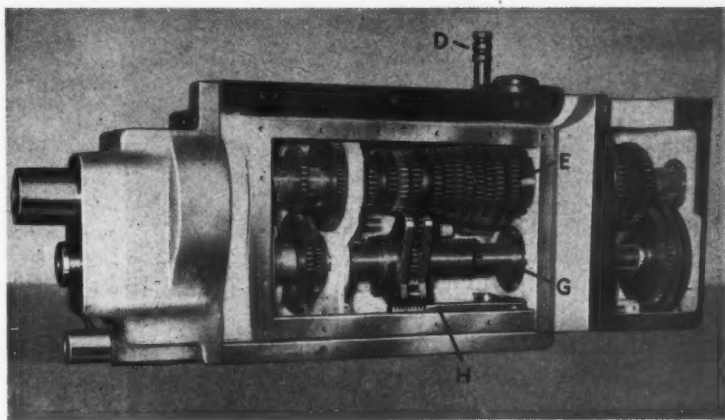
View of Synchromatic feed gearbox from the rear. This gearbox is totally enclosed, when fitted to a lathe, and provides for cutting 384 different threads without the use of change wheels
